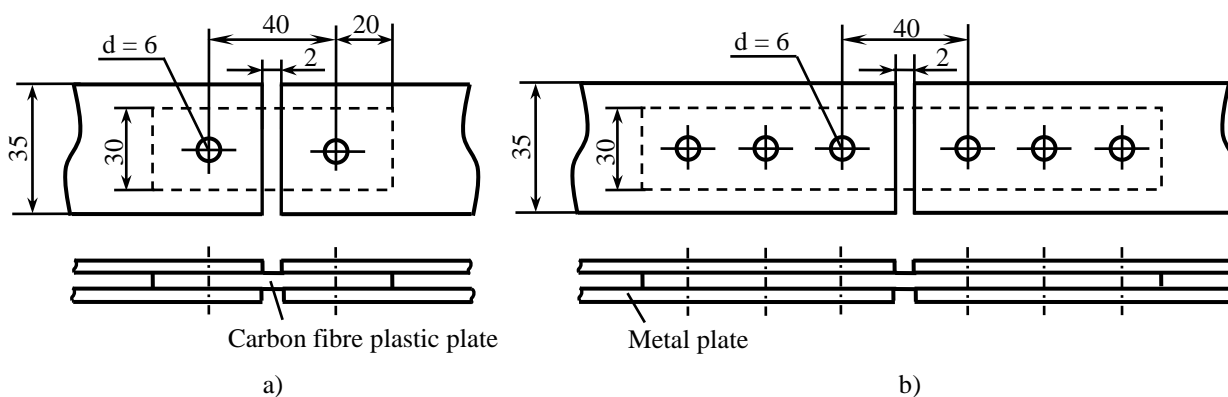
The Specimens of Double-Shear Bolted Joints of a Composite Plate with Metal Plates: a) Single-Row Joint; б) Three-Row Joint
